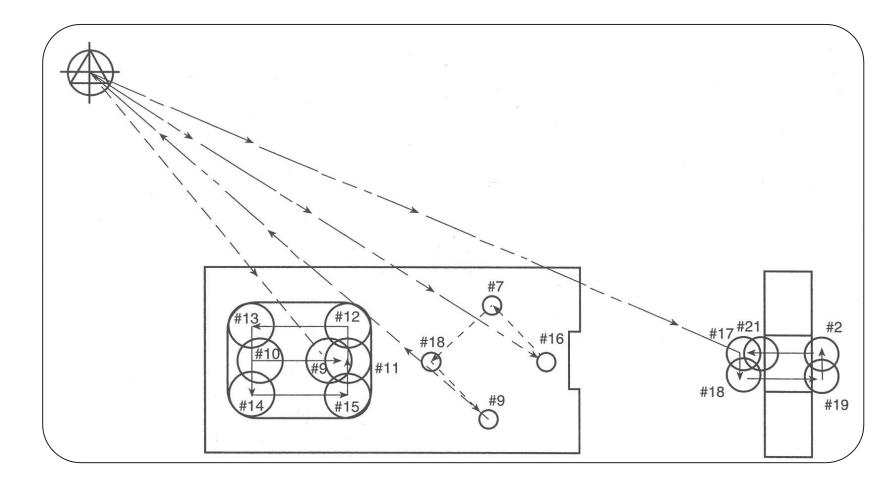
Cutter path for milling the slots and drilling the holes in the part in Figure 13
